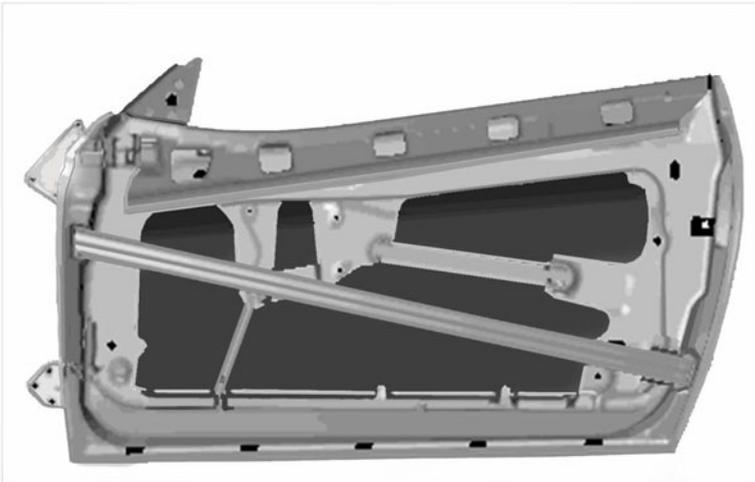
Example of a spider door frameless window frame. Additional straight braces with reinforcement purpose can be noticed.
